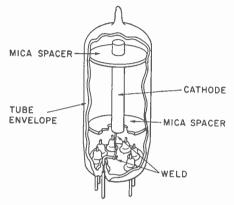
Cut-away view of a tube, showing the connection to the cathode. The rest of the elements have been omitted in this sketch.
